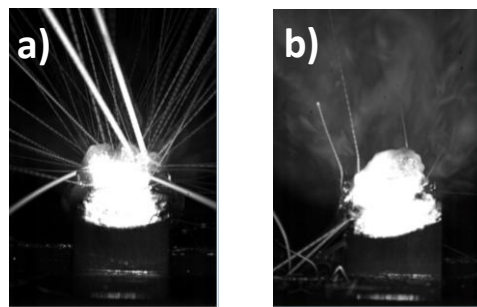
Spatter behavior using single spot (a) and Bright Line Weld (b) setups
